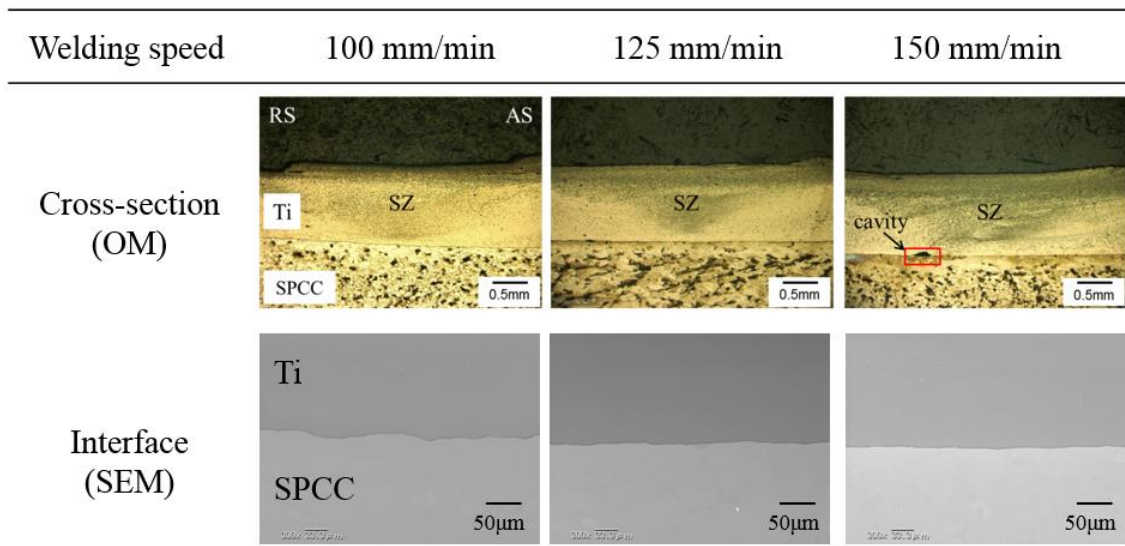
Cross-sections and interfaces of the joints with different welding speeds of 100, 125 and 150 mm/min at constant welding parameters of 350 rpm and load 9.8 kN.
